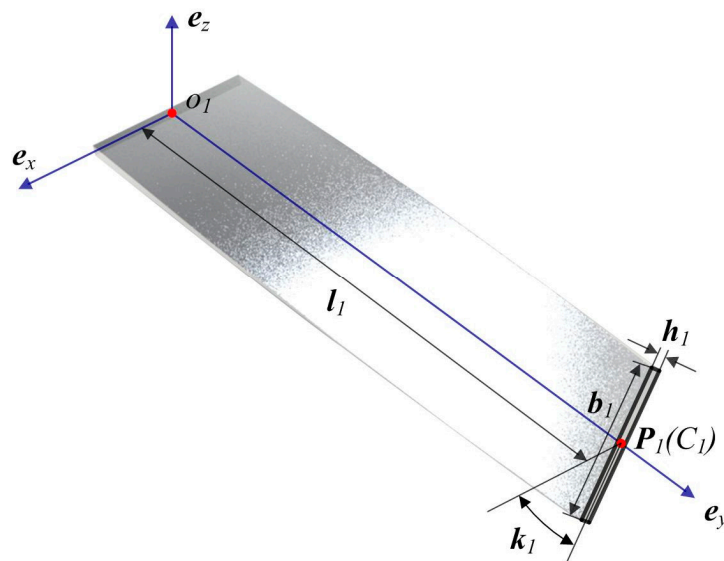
Geometries of a pre-twisted structure with rectangular cross section.
